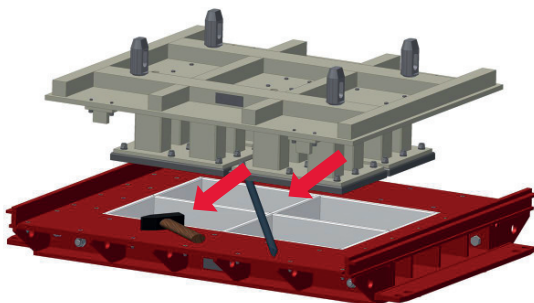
</sup> The type plate of the tamper head and of the mold bottom must point in the same direction.
